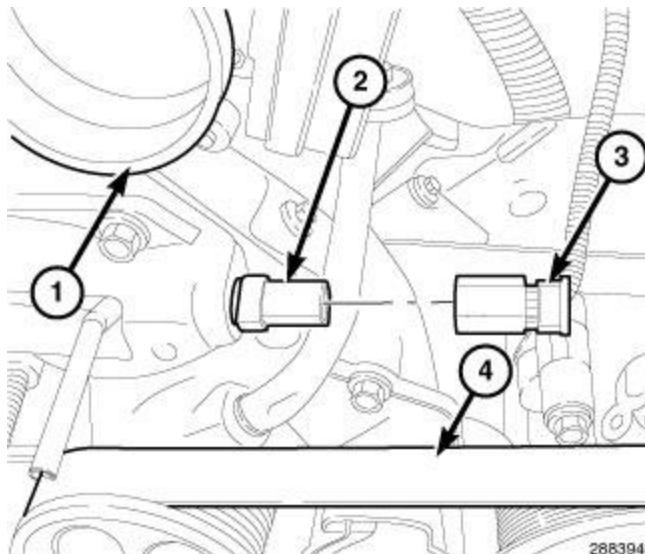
Electrical Connector, Sensor & Water Pump Housing
